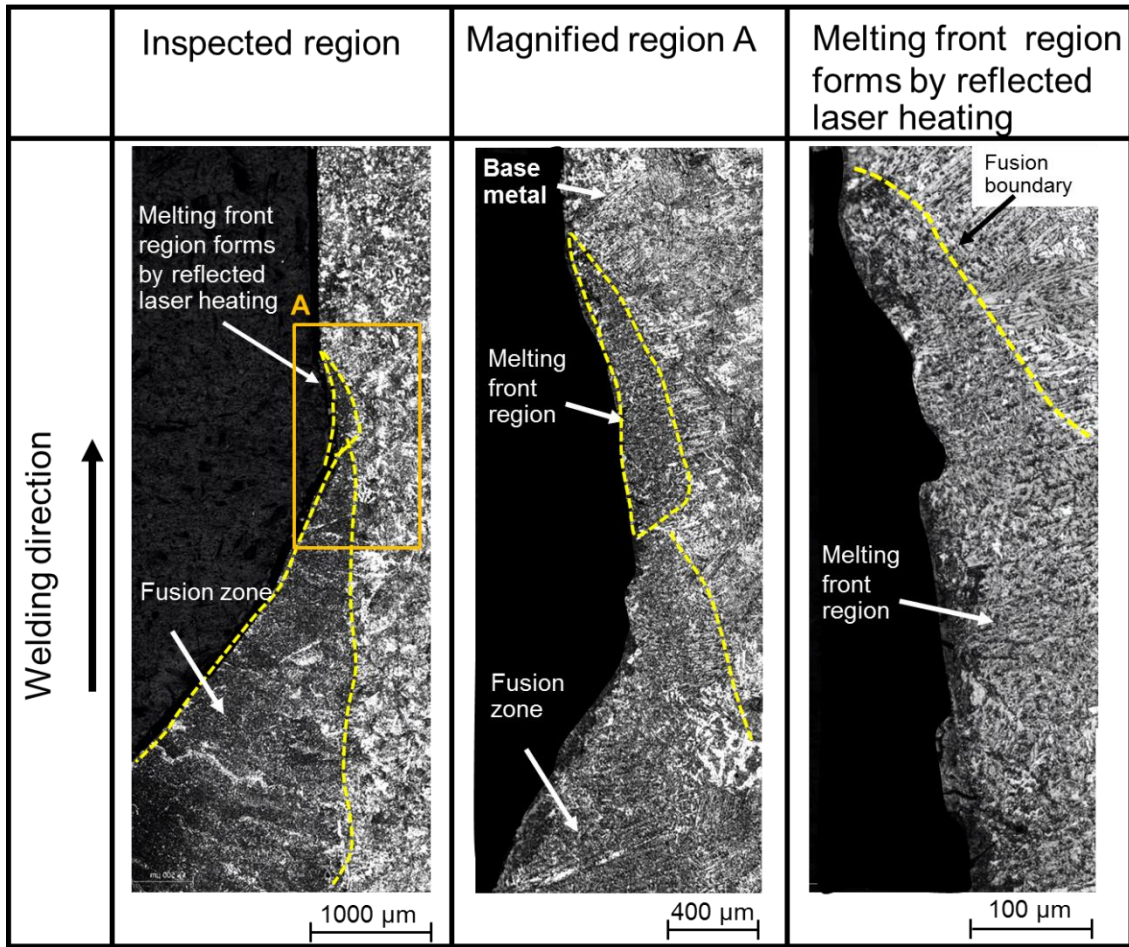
Macro cross section (cut in parallel welding direction) of hot-wire laser feeds with irradiated power density of 55 and 111 W/mm².
